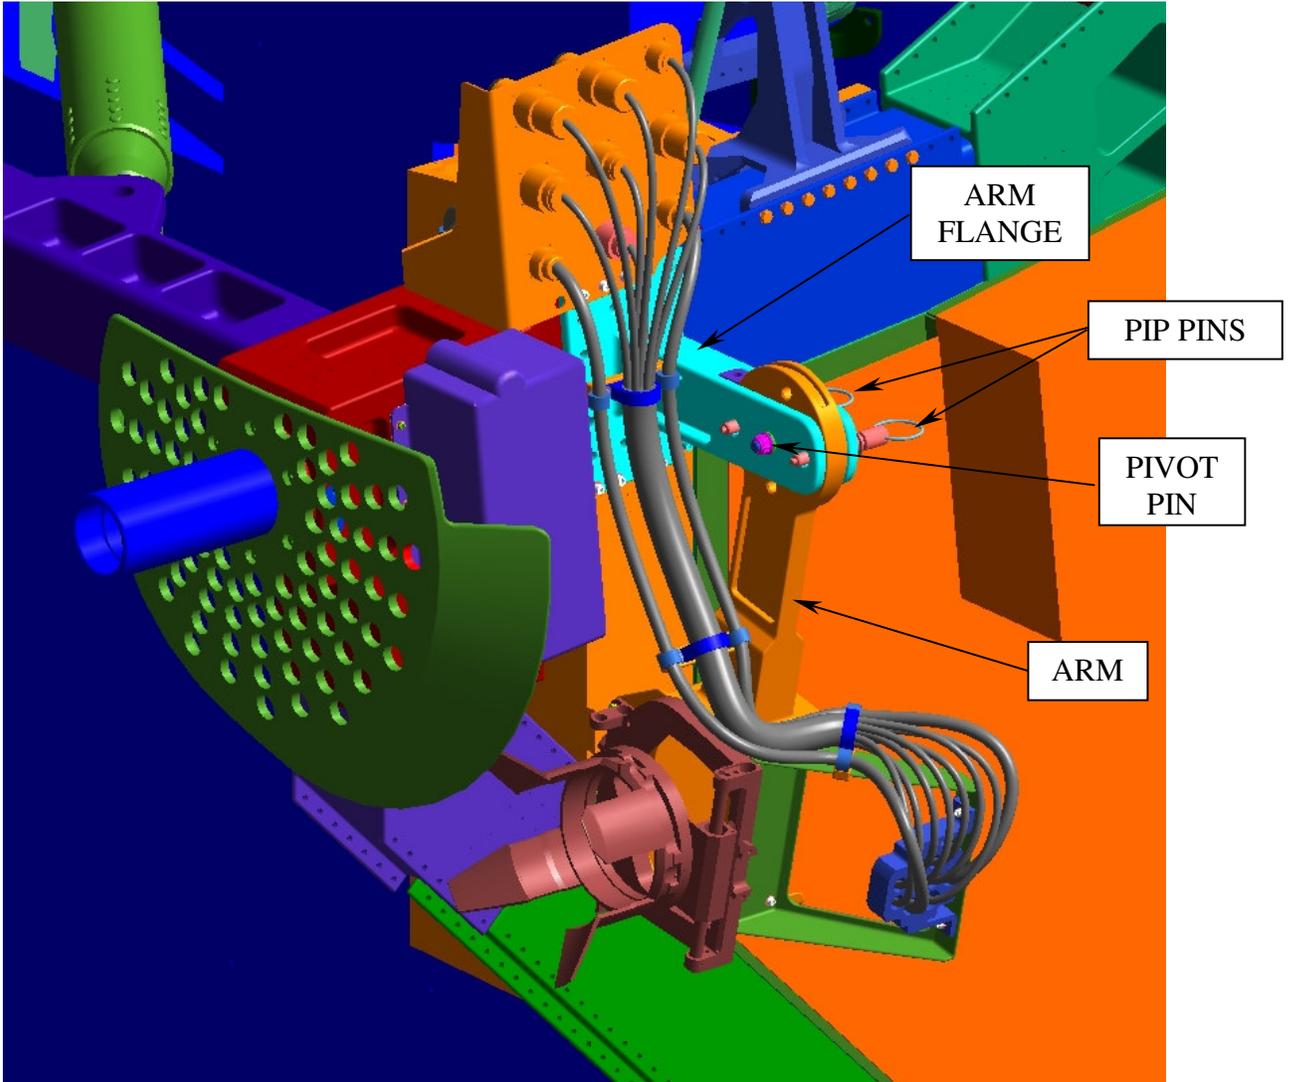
ROEU Assembly Folded Configuration (ISO View from Starboard Side)
